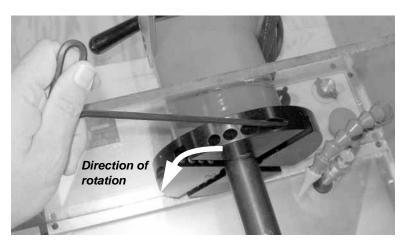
Loosen the set screws to install the tool in the rotating head.
